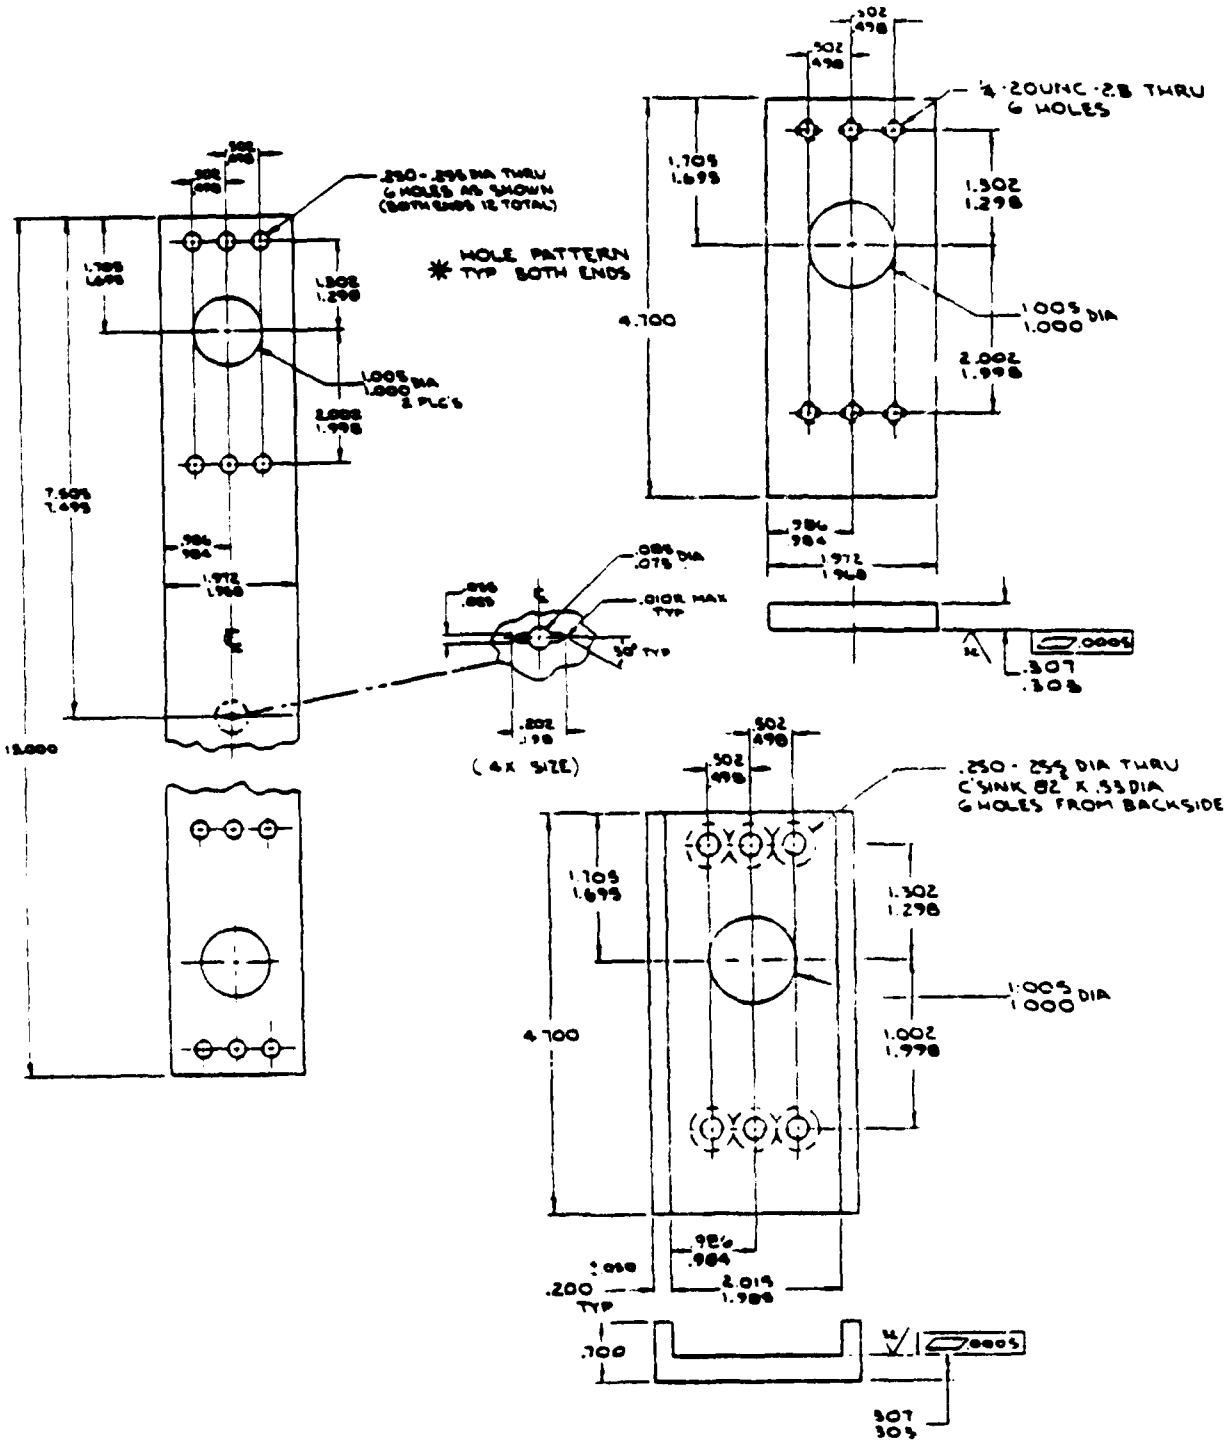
Drawings Showing the Dimensions of the Preliminary Specimen Used for 200 Hz Testing
